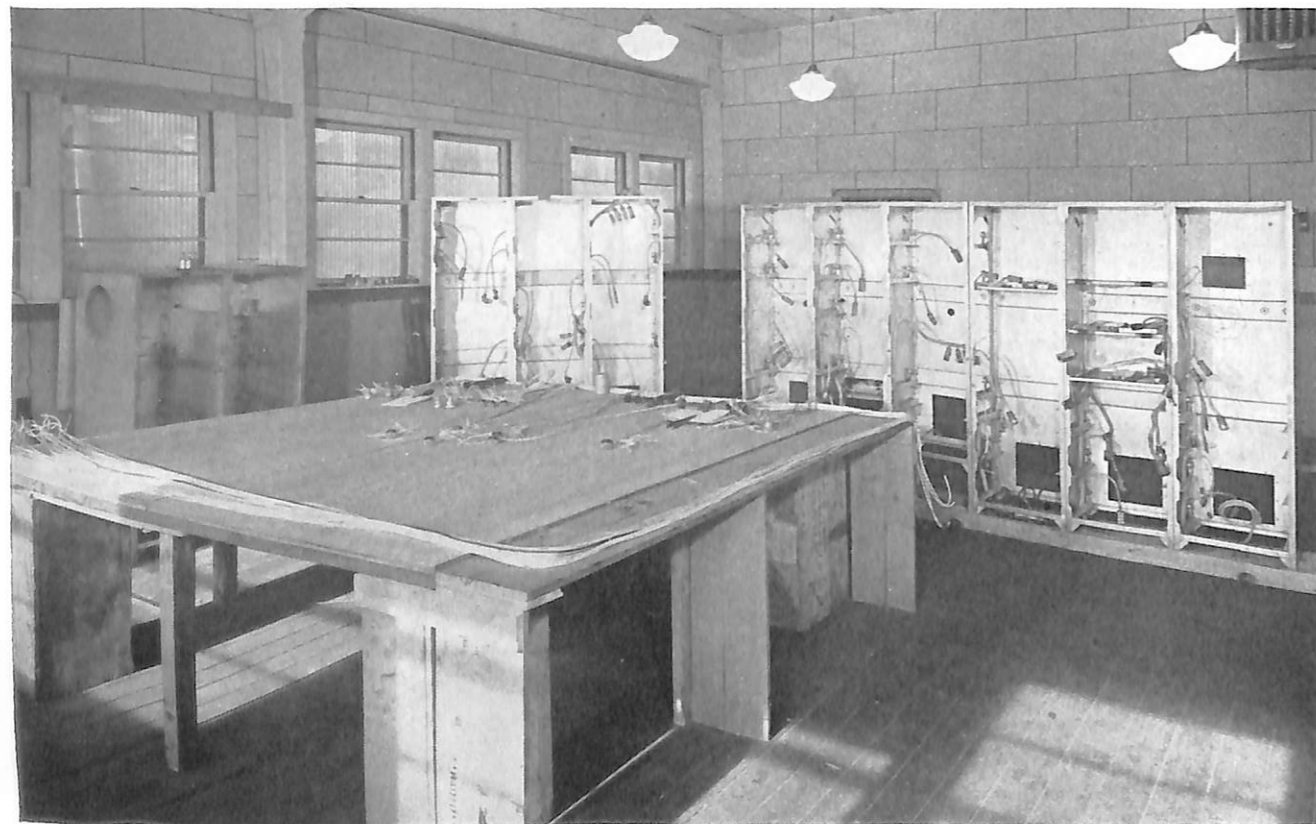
G. C. A. equipment racks being refitted with wiring, plugs and connector boards.
